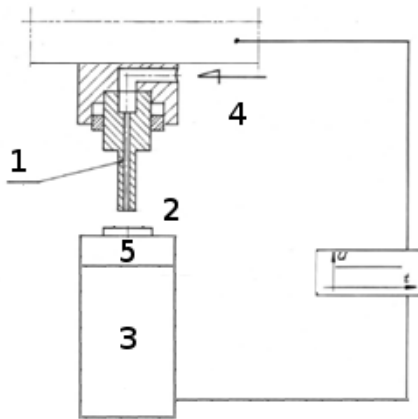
Scheme of ECM sinking test stand : 1-working tool, 2-workpiece electrode, 3-machine body, 4-electrolyte inlet, 5-electrode clamp
